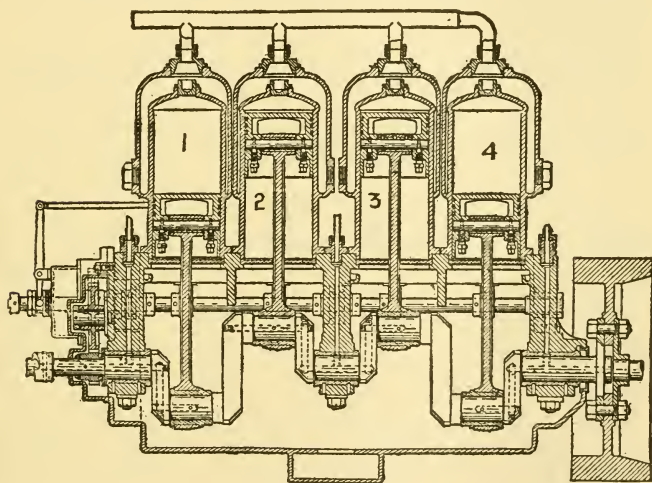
A typical four cylinder engine, showing position of cranks and working parts, including secondary shafts.
